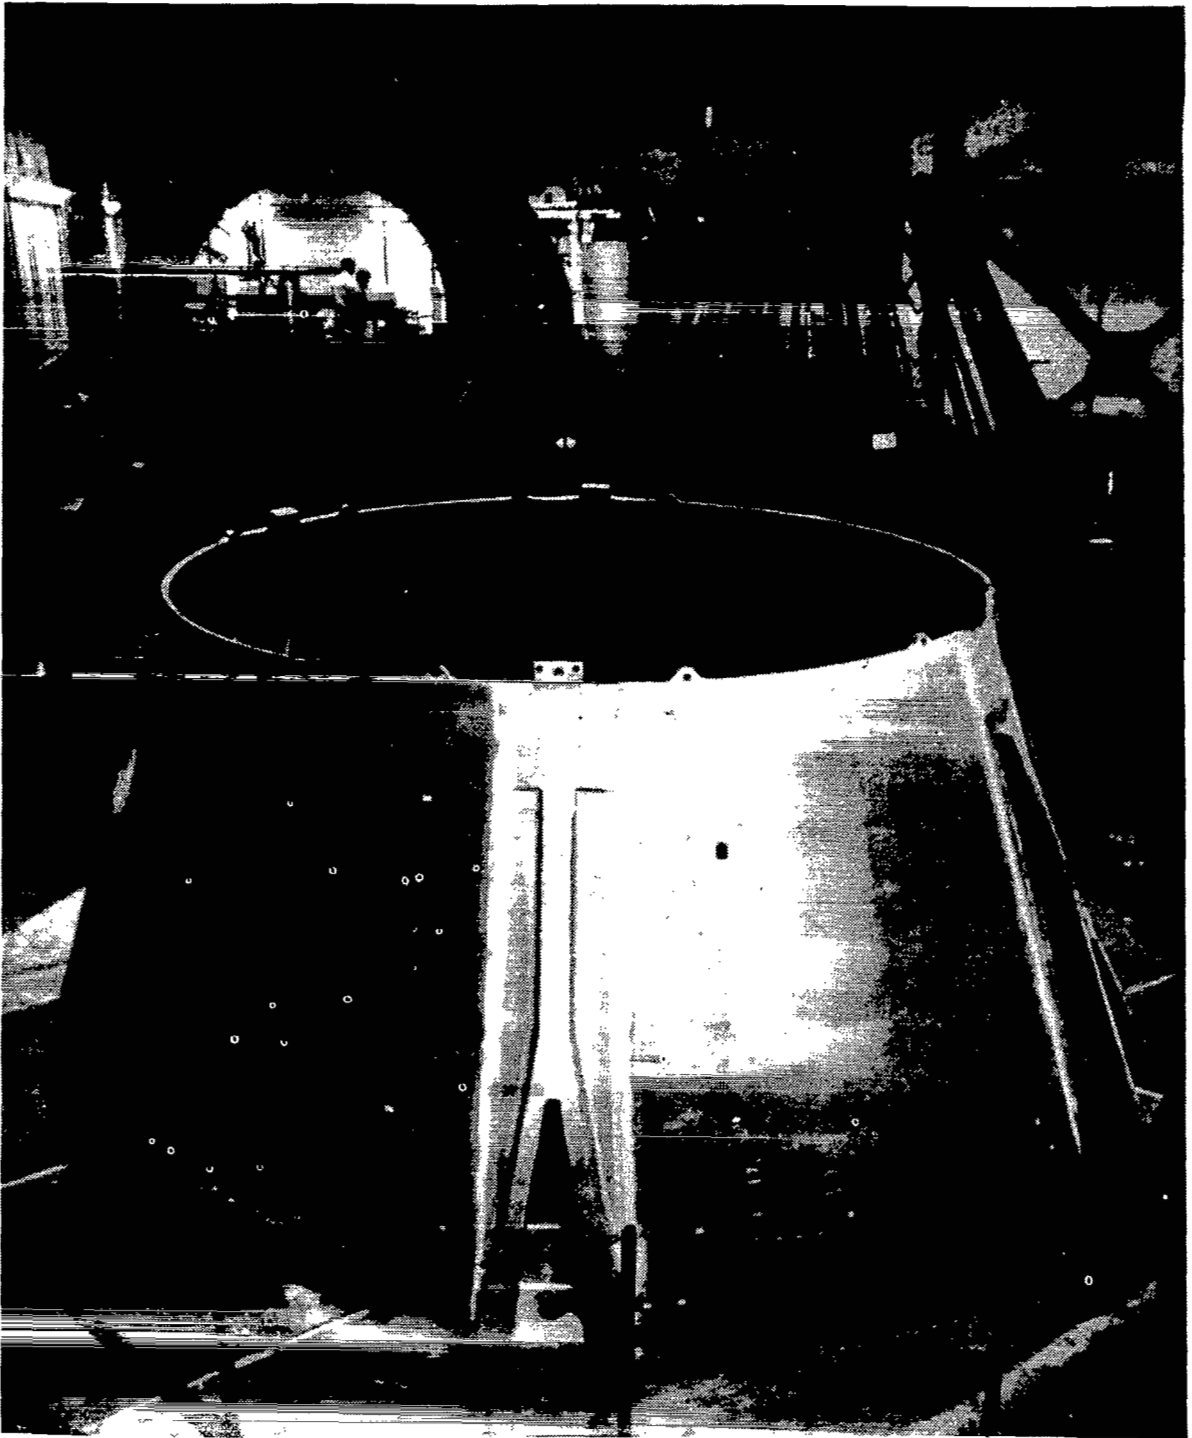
Aft skirt — holddown posts welded to skins.
